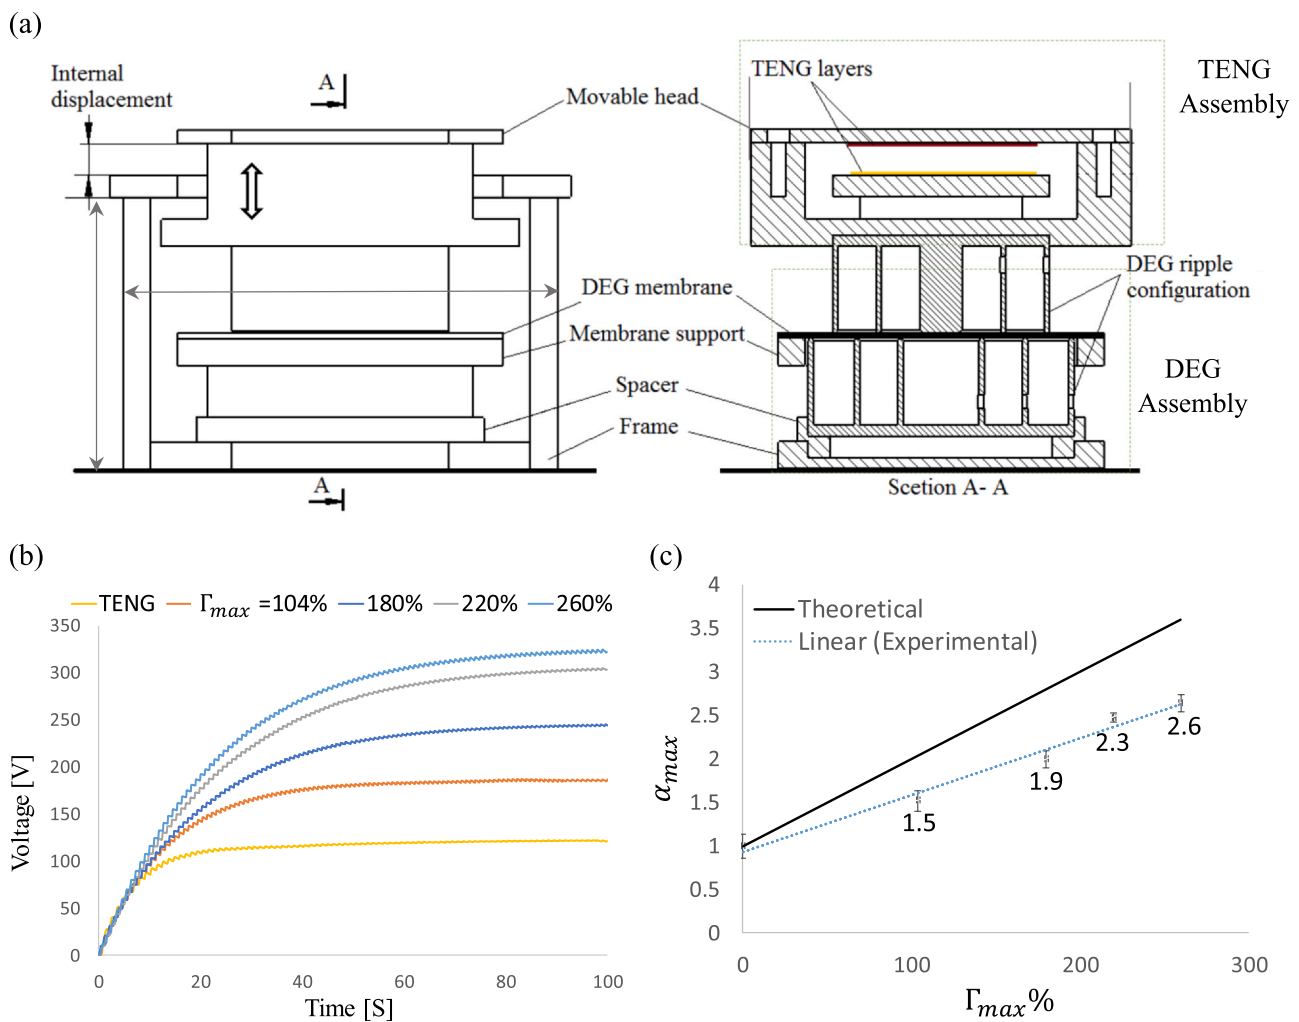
Performance of a dielectric-triboelectric generator (DETEG) prototype: (a) Prototype drawing. Front view of the prototype presented on the left that shows the overall profile of the prototype. A cross-sectional view presented on the right that shows the details of the TENG and DEG; (b) Voltage on the load capacitor with time while charged by TENG and DETEG at four levels of capacitance change ratios Γ_{max} ; (c) Experimental saturation voltage amplification with Γ_{max} along with the theoretical trend. Four DETEG samples are tested at each Γ_{max} value, where the maximum, minimum, and mean values are indicated at every experimental data point.
